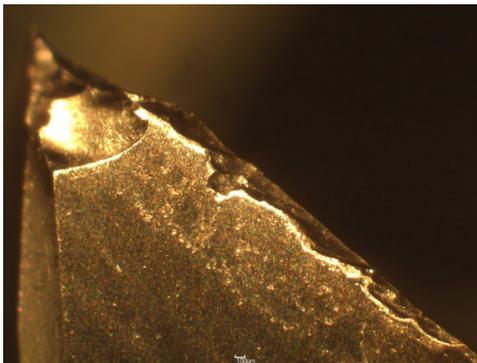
Tool flank wear for treatment 30 m/min and 0.15 mm/rev
